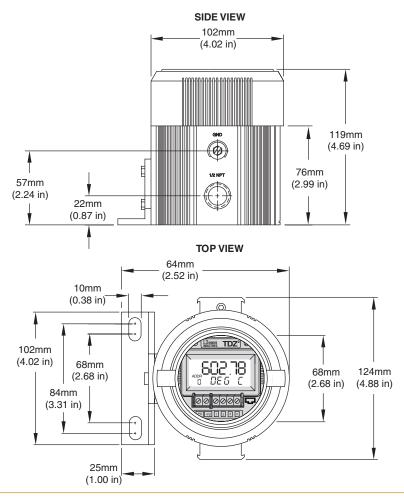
Dimensions for TDZ² in D-BOX field-mount enclosure
